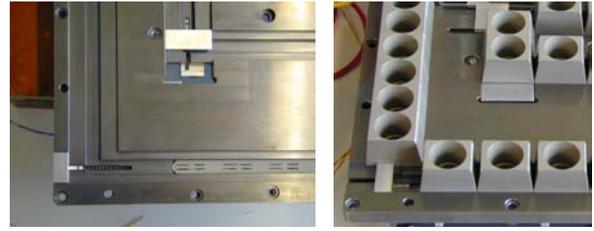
Sample storage groove (detail of a corner without and with dummy samples)
